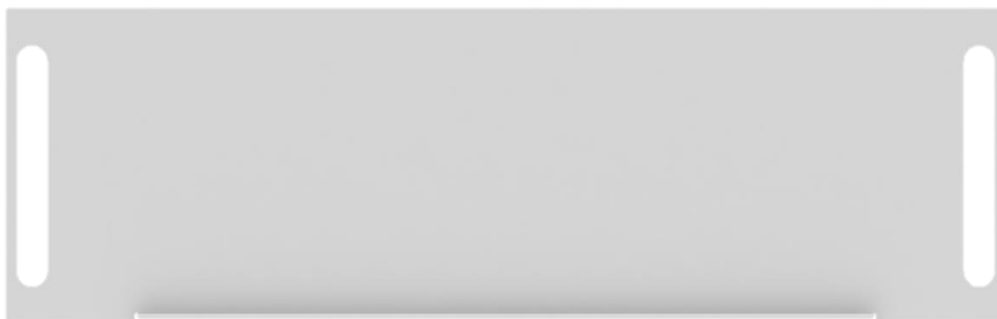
Top plate that mounts to the two side plates for the Blank Catch
